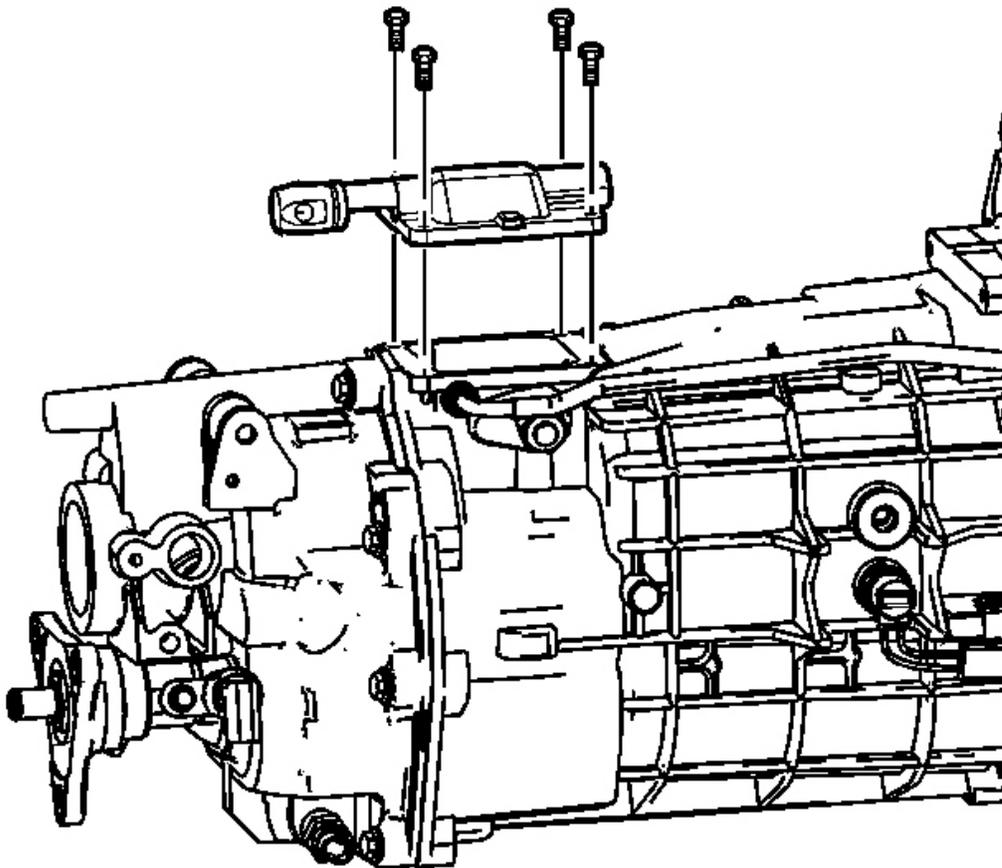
Removing/Installing Shifter Cover Plate & Bolts
